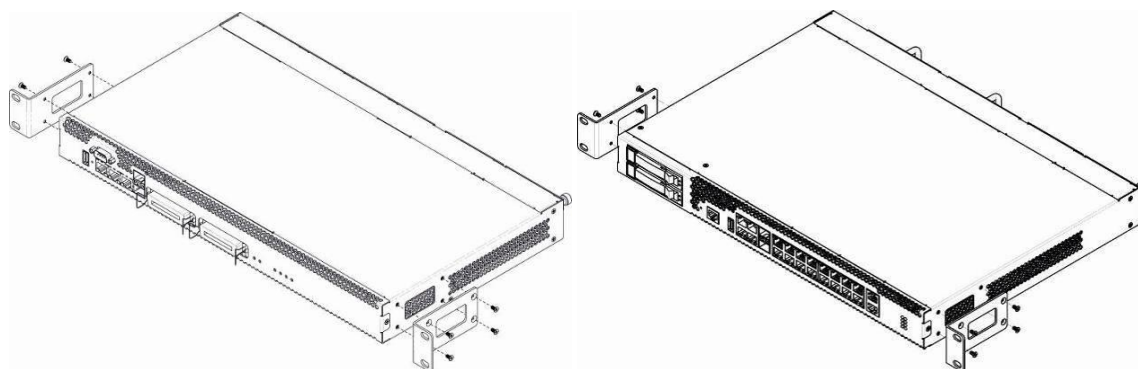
Mounting brackets for SBC-1000 (left) and SBC-2000 (right)
